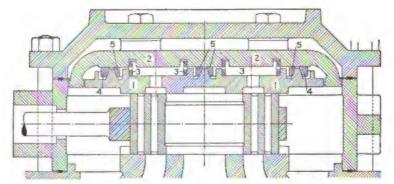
American Balance Slide-valve Company's Two-faced Flat Valve for Locomotives.
